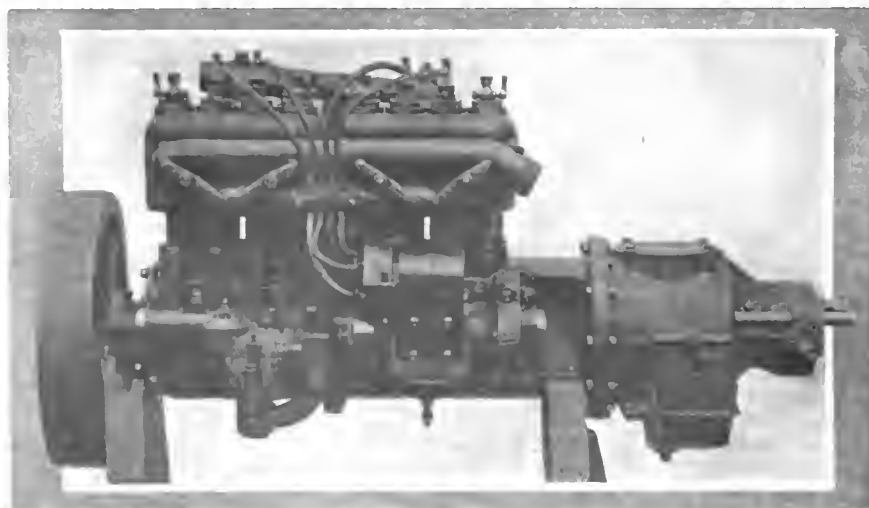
Left side of the motor, showing magneto, fan in the flywheel, sliding gear system, Breeze carbureter, and unit construction
